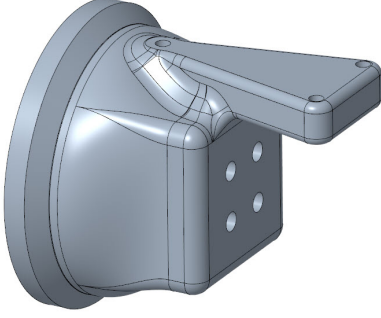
Isometric view of the end of arm. Top: camera mounting. Right: Vacuum ejector mounting. Left: connection to robot flange.
